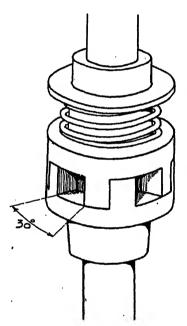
Clutch Drive on Vertical Shaft giving Angular Displacement of Cam Shaft when reversing (M.A.N.).
